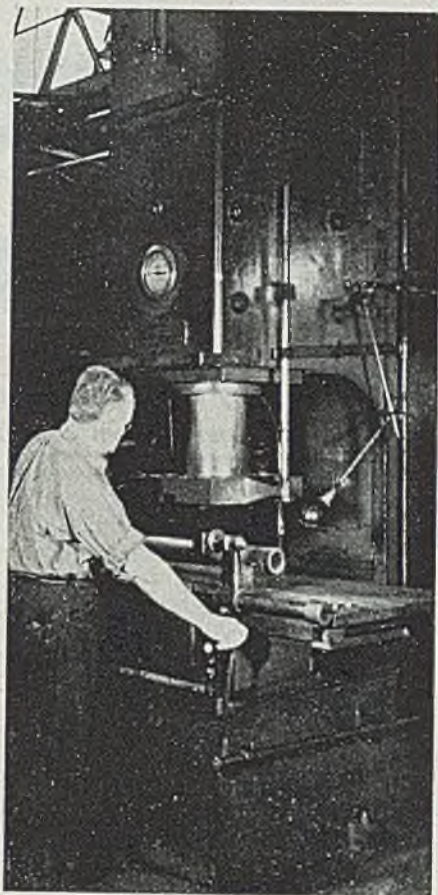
A standard 50-ton hydraulic press here is shown straightening steel tubes for composite rear axle housings at Mack Truck Corp., Allentown, Pa.
